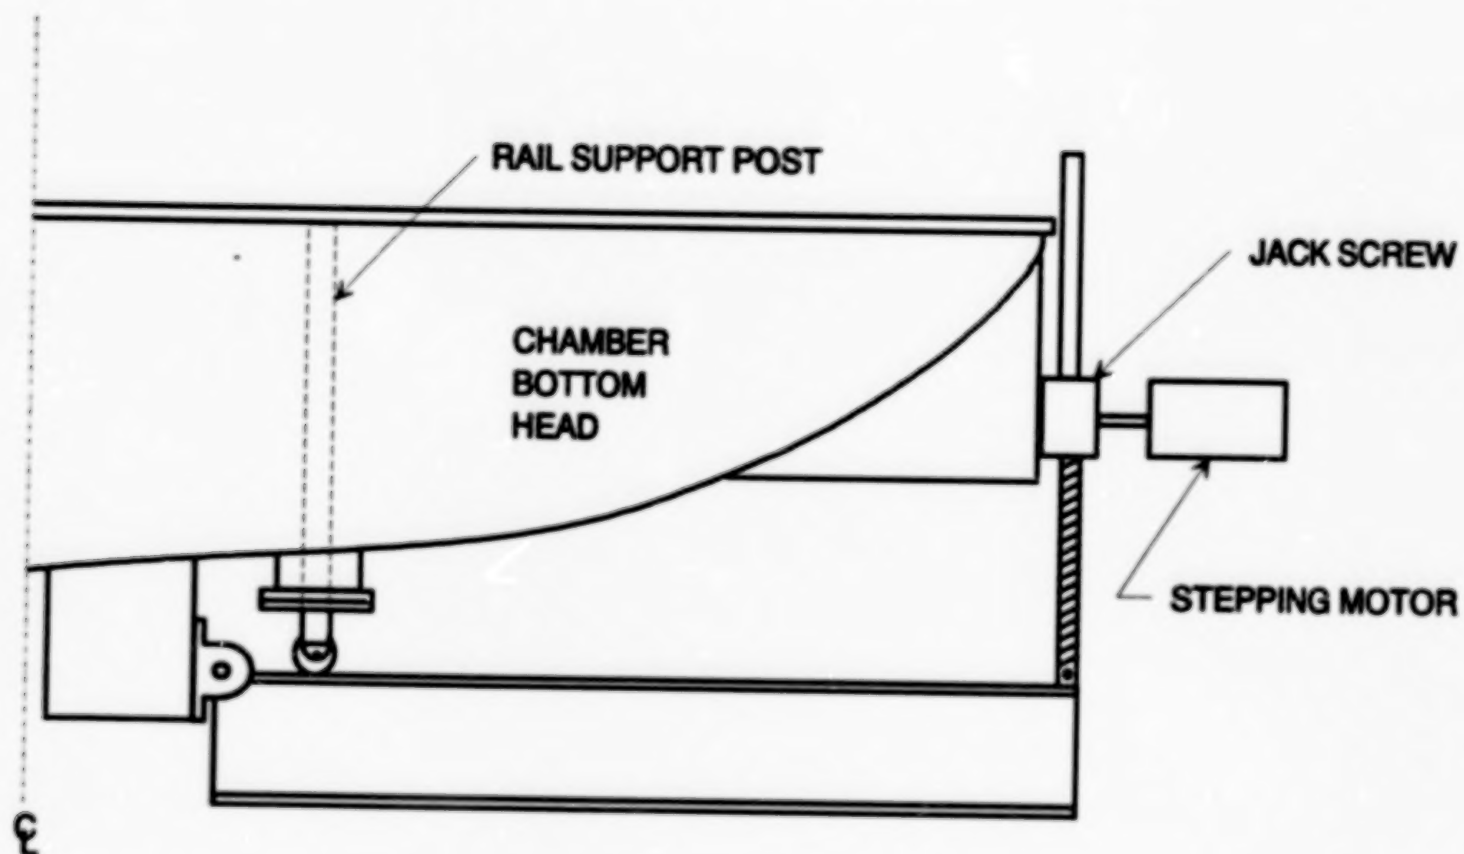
FINE ELEVATION ADJUSTMENT MECHANISM
